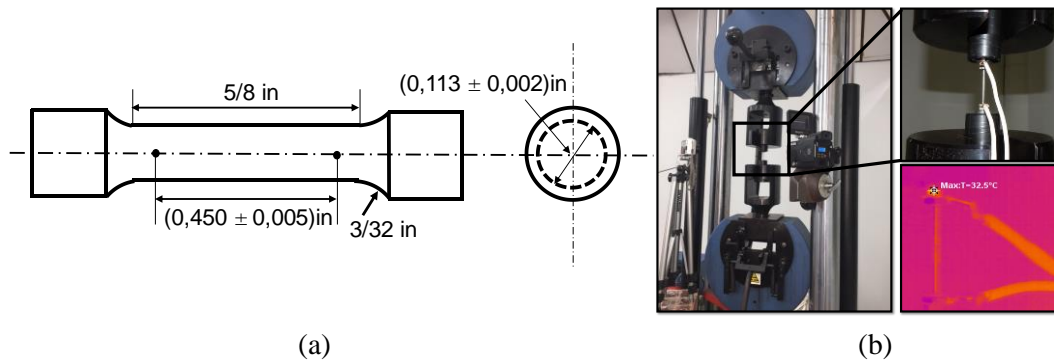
(a) Dimensions of specimens. (b) Experimental set up of tensile testing.
